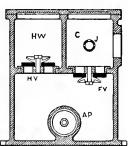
is a more complete drawing of an air pump as applied to vertical marine engines.
